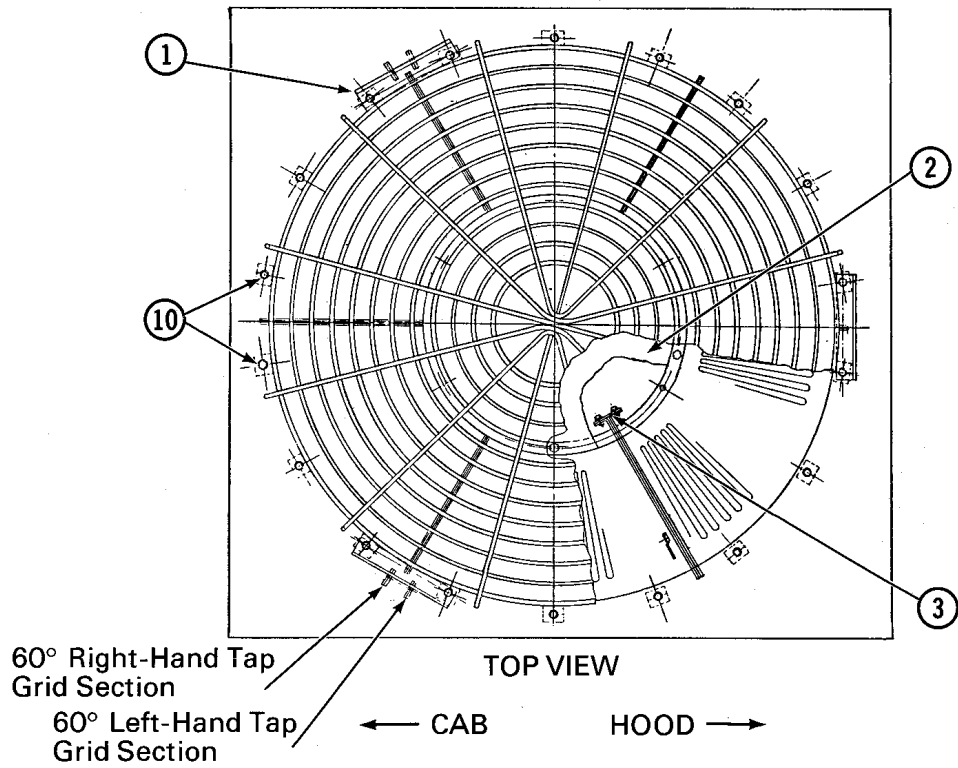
Exploded View of Dynamic Brake Grid Assembly six 60° grids
